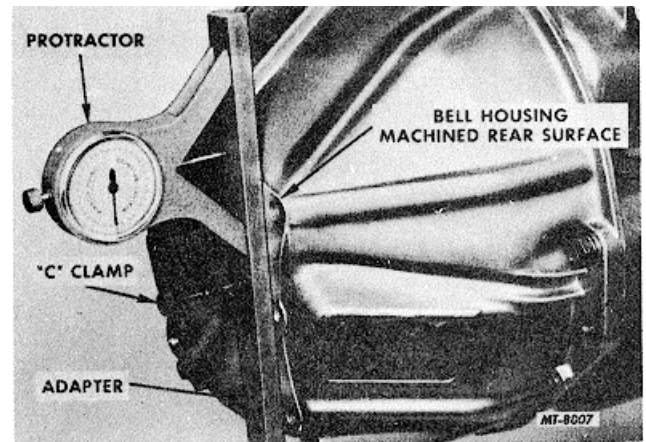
Checking Bell Housing Vertical Alignment Using SE-2067 Magnetic Base Protractor
